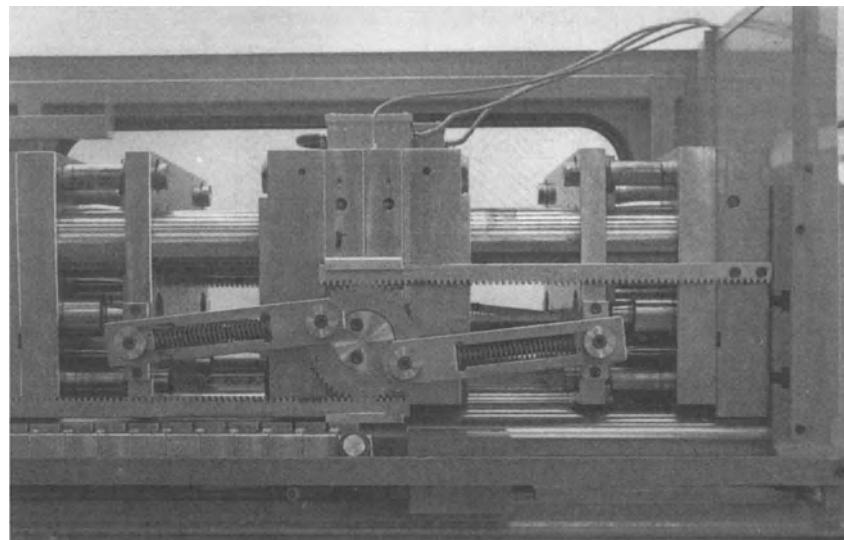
Stacked mold in the open position with rack-and-pinion gears operating the stripper plates.
